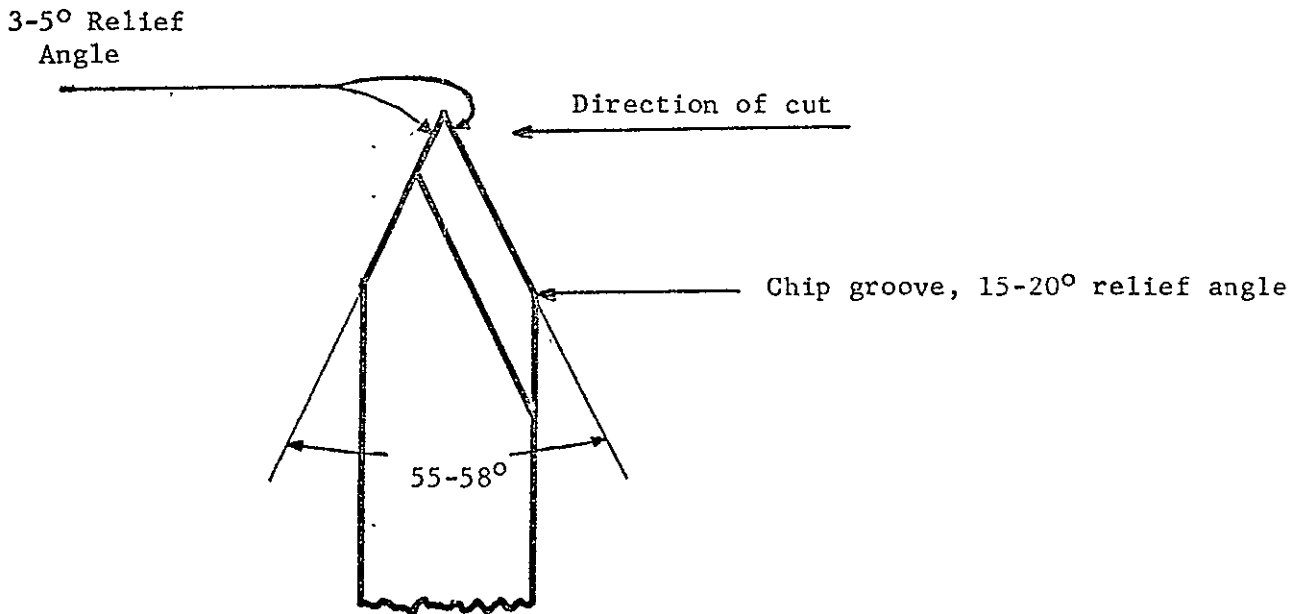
CUTTING TOOL USED FOR THREADING MANDRELS
